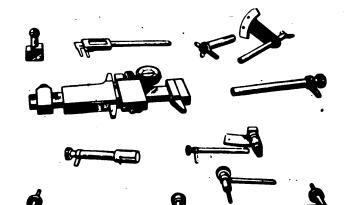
Fixtures for Check-ing Clearances between Gear Teeth of Centifugal Compressor Engine Drive Gear Accessory
